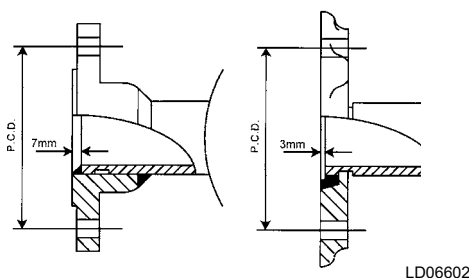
ANSI/AWWA C-606-ADAPTER FLANGES
